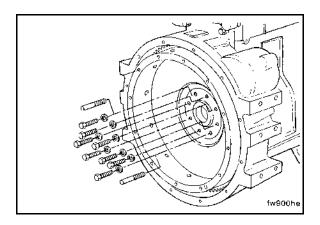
REMOVE THE T-HANDLES AND GUIDE PINS
